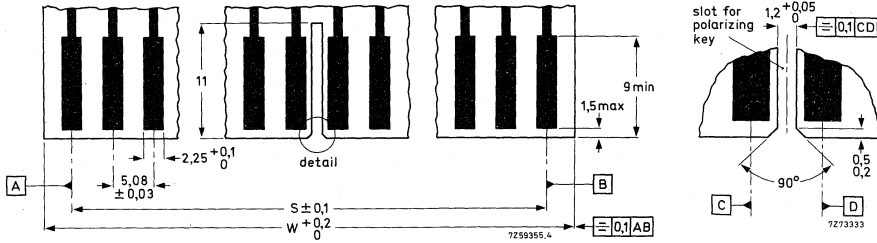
Recommended dimensions of the printed-wiring board; see Table 4 for dimensions S and W.
